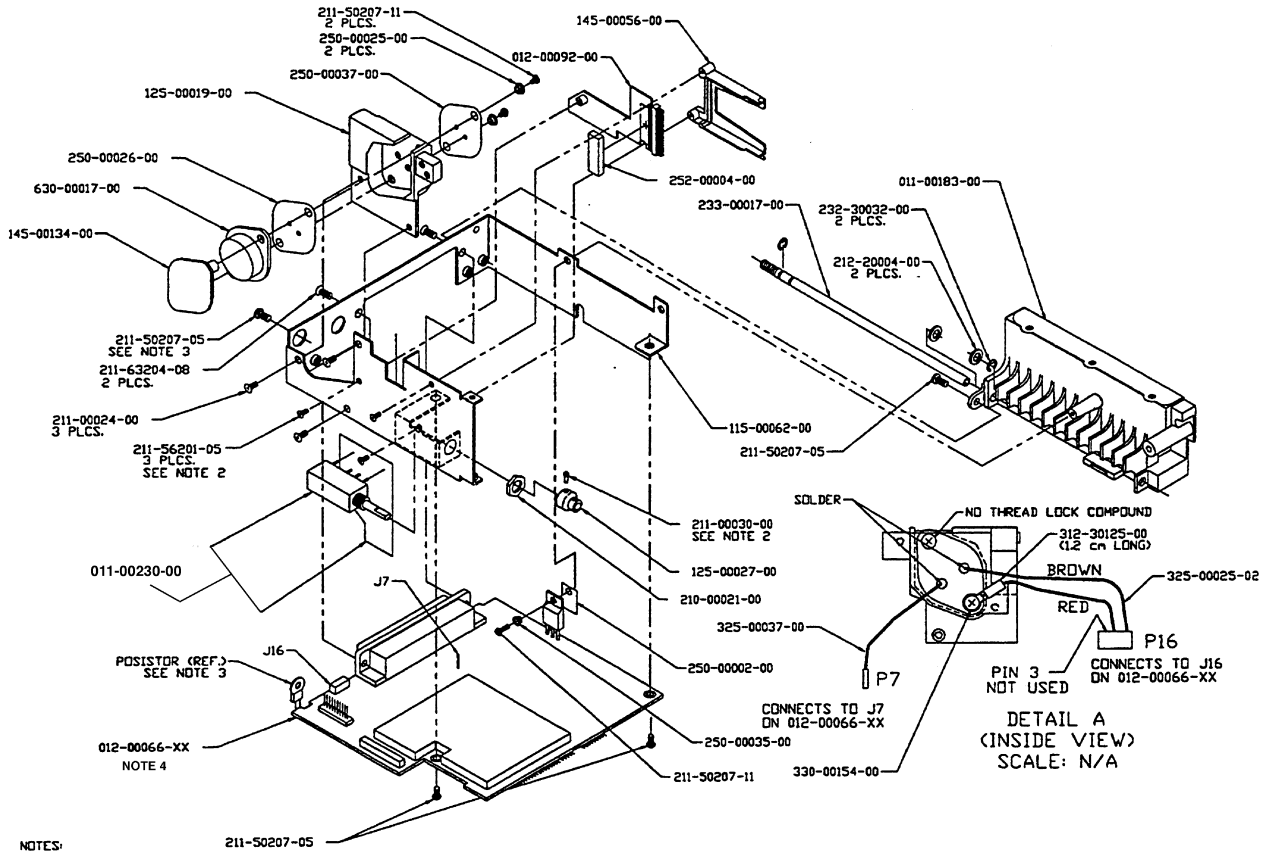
GNC 250/300 Assembly Drawing (View 2)
